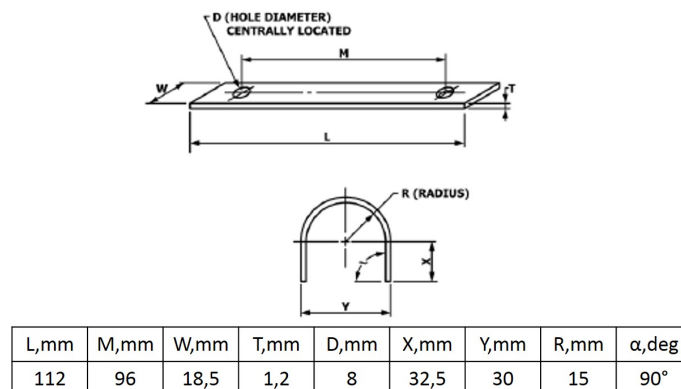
Geometry and dimensions of U-bend specimens specified by ASTM G36.
